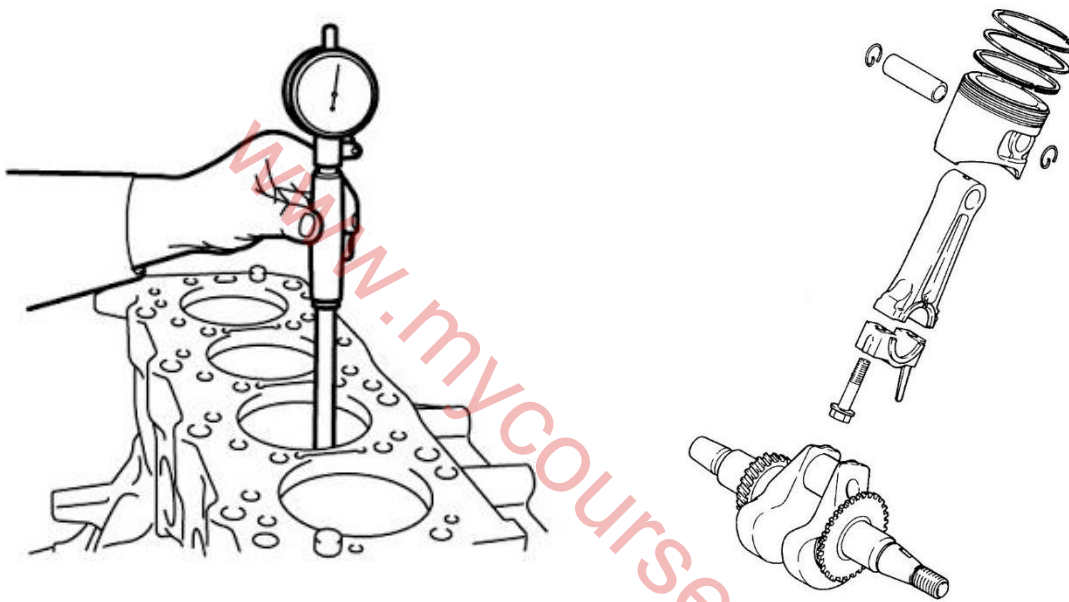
ENGINE BLOCK, CRANKSHAFT AND CONROD ASSEMBLY
